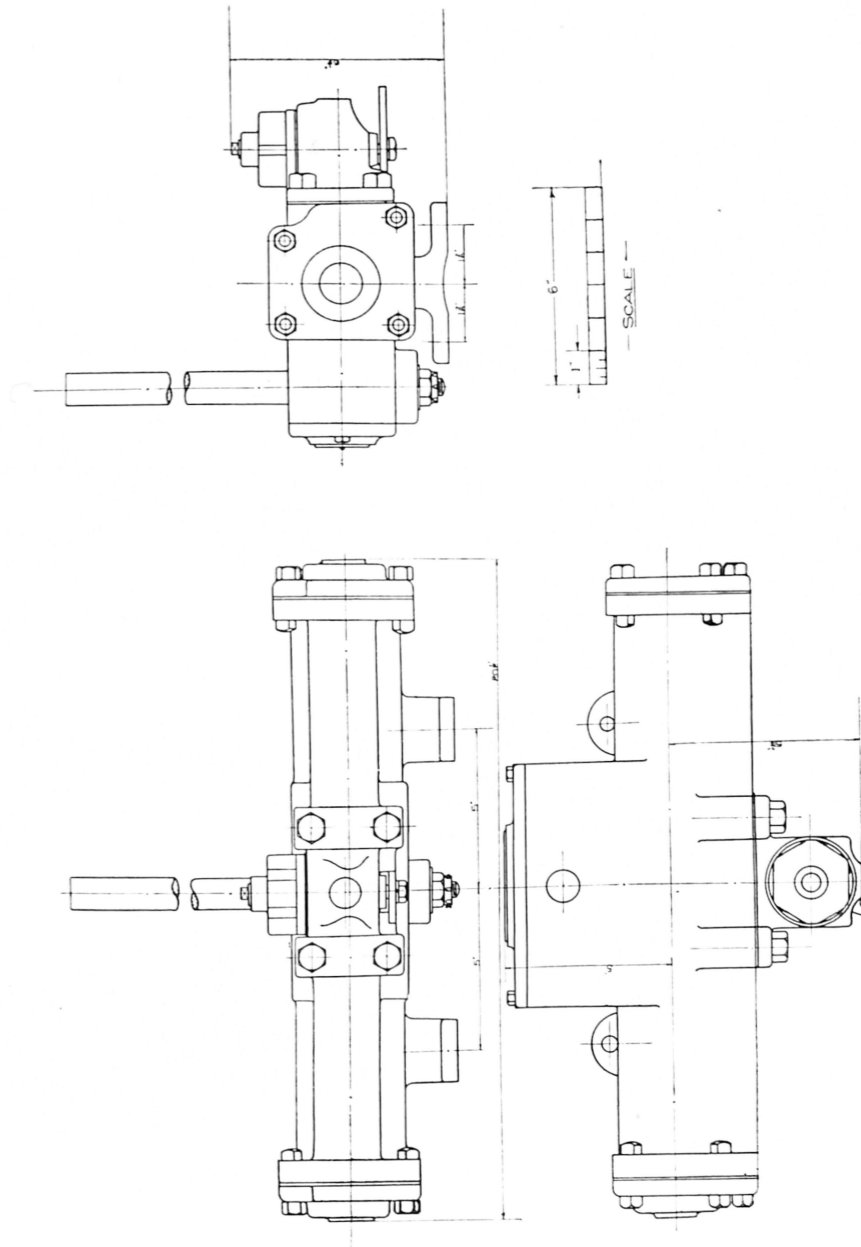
General Arrangement of Type "K" Folding Door Engine, fitted with Rotary Valve.
